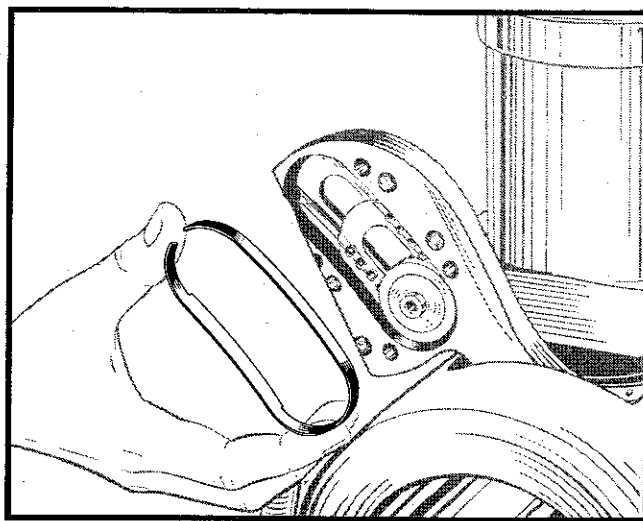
Installing Counterweight Bearing Retainer Spacer
